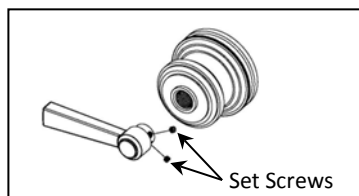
A: HANDLE with Set Screw(s) on Side or NO mounting screw
